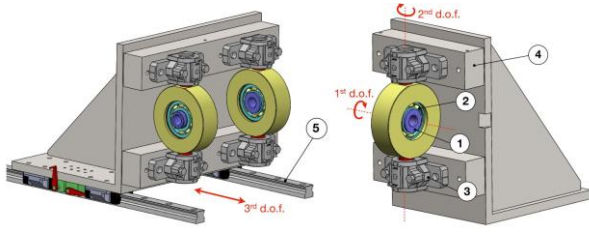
Drawing of the supports of the four point rotating bending test bench. 1: polymeric bushing. 2: rotating bearing. 3: fixed bearing. 4: movable bracket. 5: high precision linear rails.
